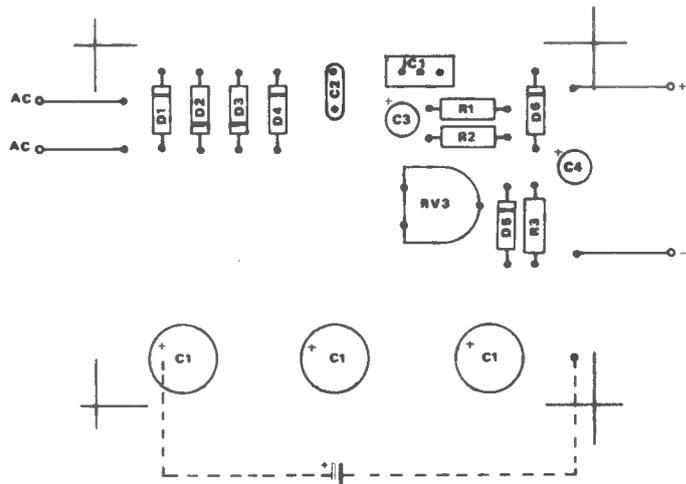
PCB foil and component overlay. Board is 70 x 45mm
